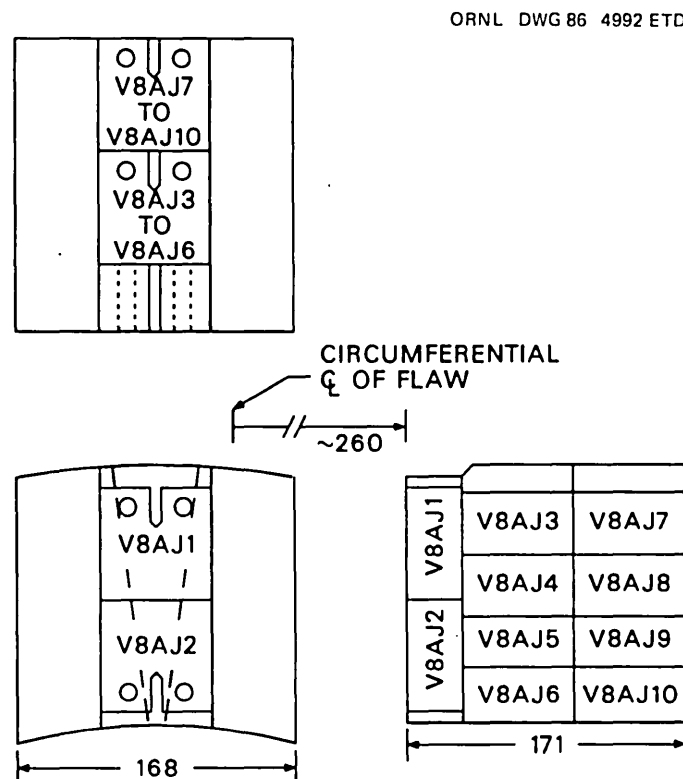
Cutting diagram for specimens V8AJ1-V8AJ10 taken from piece V8A-CA; specimen notches are located on centerline of weld.
